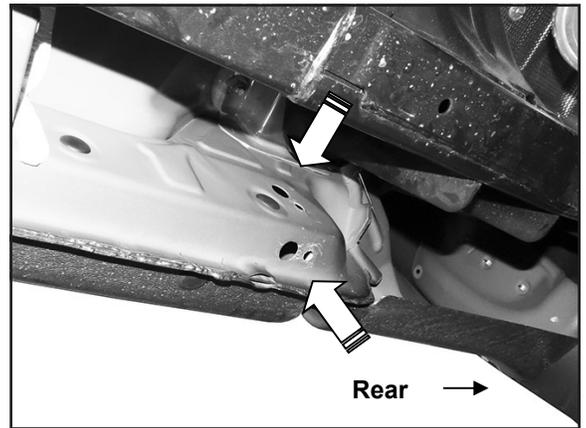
Attach Mounting Bracket to Clip Nuts.
